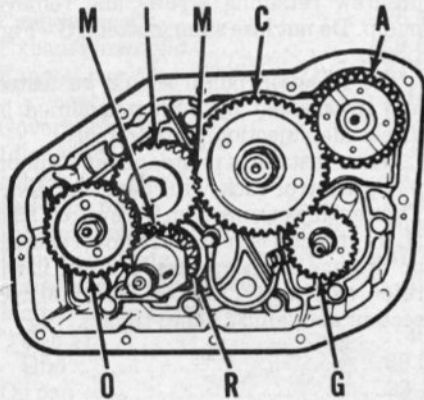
View of timing gears on Models 832, 833, L27 and L40.
